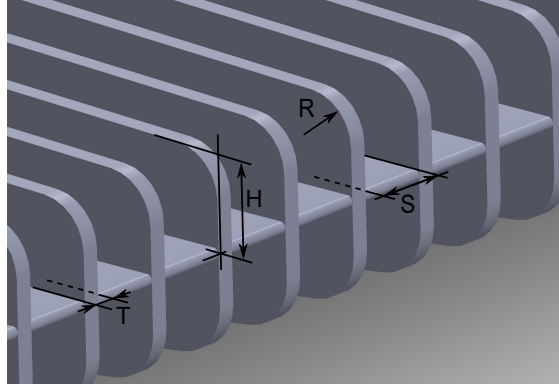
CAD drawing of a trailing-edge insert used for its 3D-printing. The different geometrical parameters involved in the design are shown.
